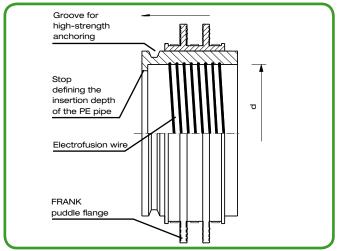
Installed FRANK manhole connection socket (SAM)
